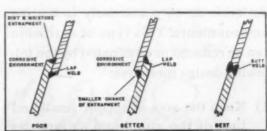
Design of welded joints from the corrosion standpoint.
